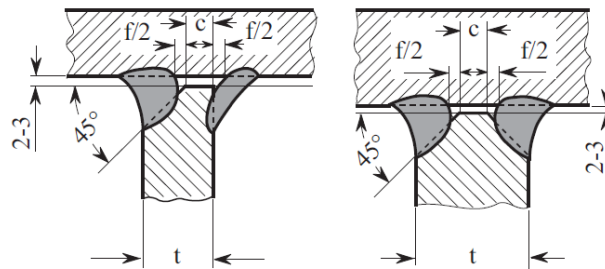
Single- and double bevel welds with an unwelded root face and a defined incomplete root penetration
